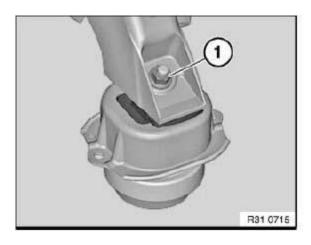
Identifying Engine Mounting Nut Courtesy of BMW OF NORTH AMERICA, INC.
